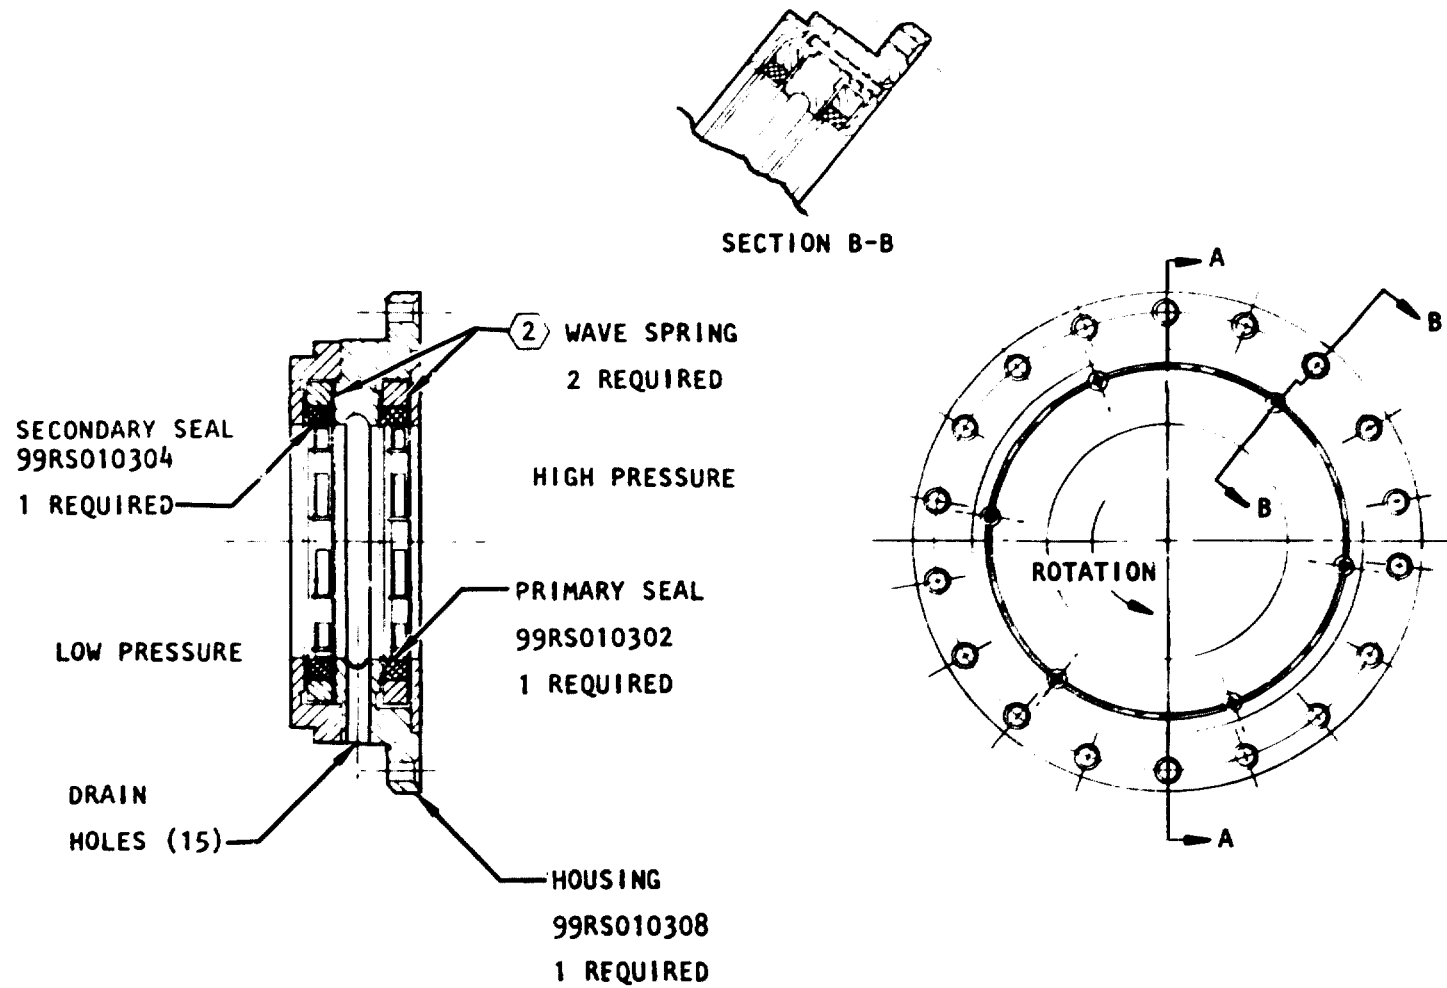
Rayleigh Step Pad Turbine Seal Assembly
